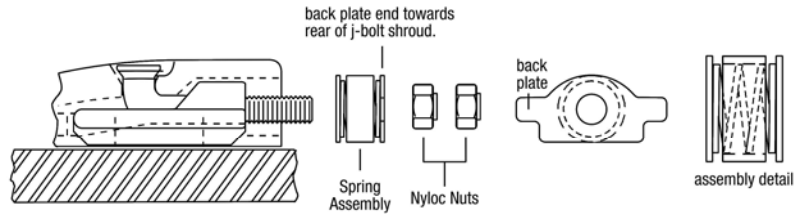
B NOTE: Above assembly is show for illustrative purposes only. Not all assemblies utilize all parts shown.
